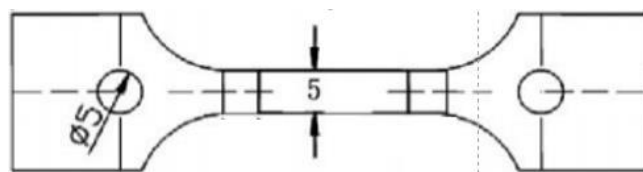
Specimen size for constant load (72mm long and 18mm wide): mm
